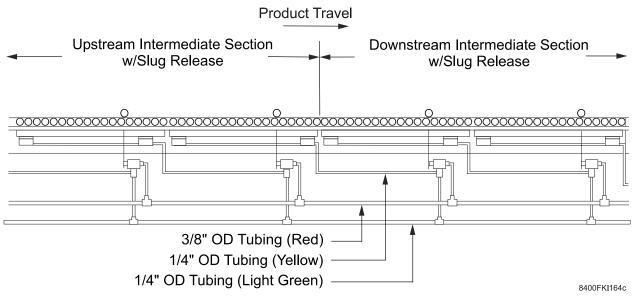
Intermediate Section Air Line Connections (Slug)
